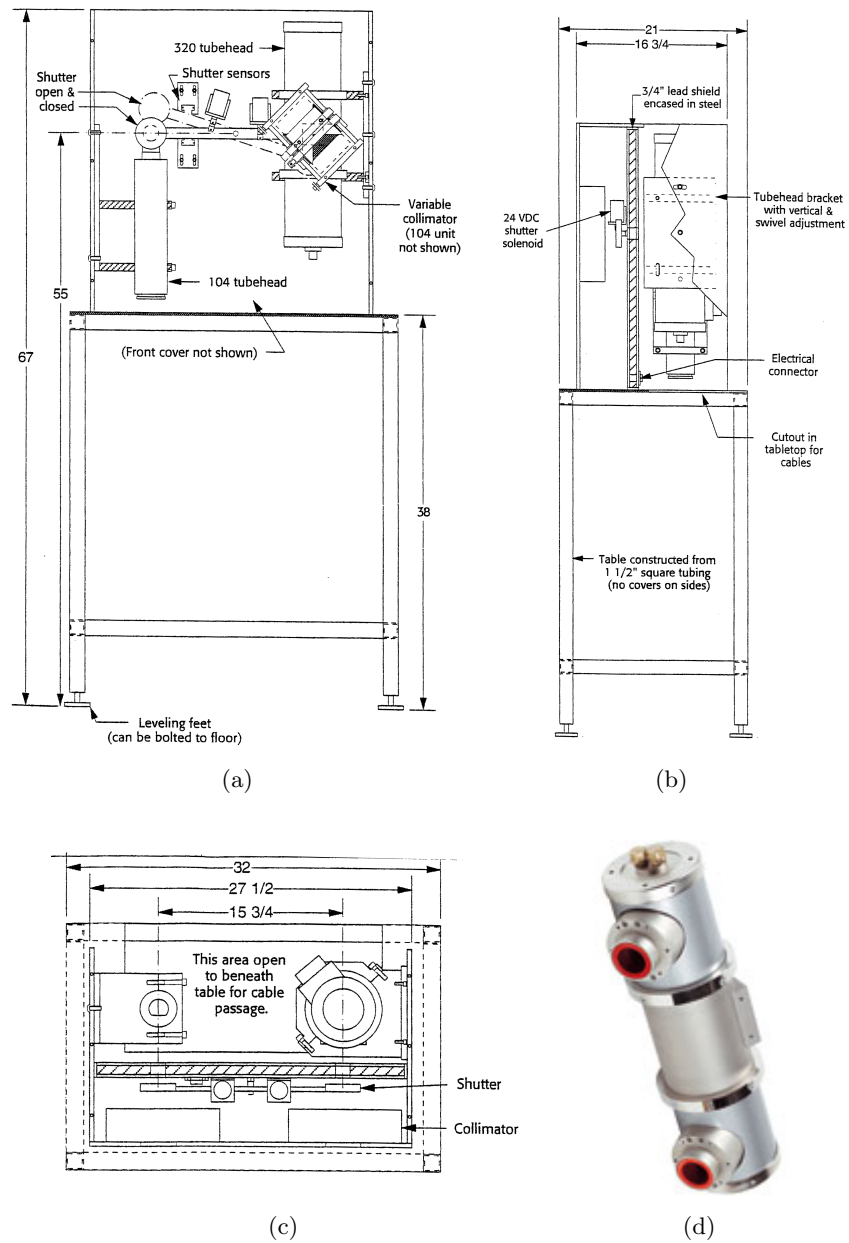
Schematics of the UWMRRC kilovoltage x-ray unit tube stand: (a) front view, (b) side view, and (c) top view; and (d) photograph of the Comet 320 tungsten anode tube, courtesy of the manufacturer.
